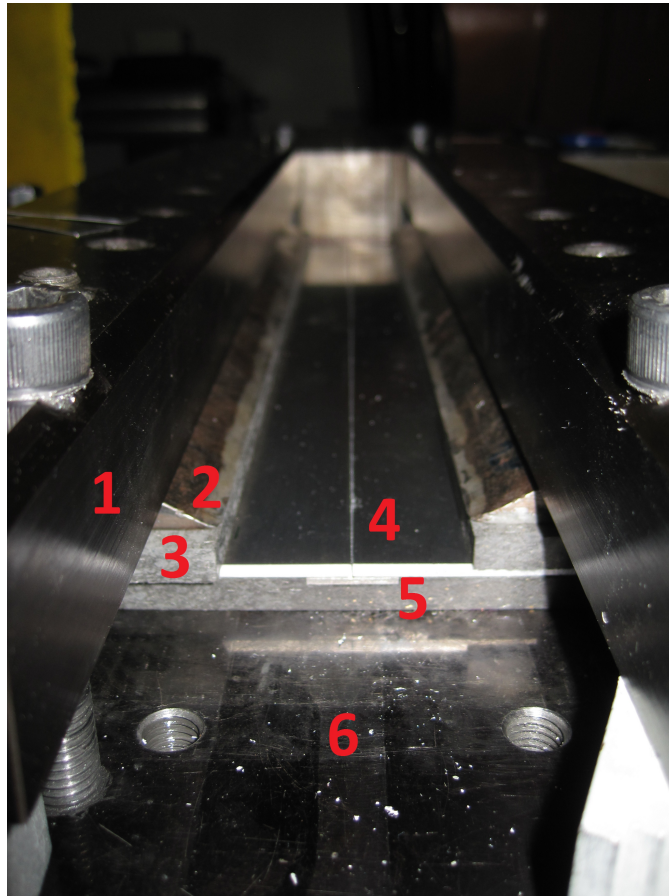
Example of assembled test structure: 1-clamping bar with M30 screws on its outer holes and M8 screws in the inner holes. 2-steel block to distribute pressure on coupon halves. 3-friction material to reduce heat loss to steel block and clamping bars (only used for tests with friction material as interstitial plate). 4-test sample halves, 5- interstitial material: in this case, the friction material with a Ti-6Al-4V strip to reduce smoke and avoid melting and stirring into the weld of caoutchouc, contained in the friction material itself, is displayed. Otherwise the 2mm thick Ti-6Al-4V plate takes its place. 5-steel backing
